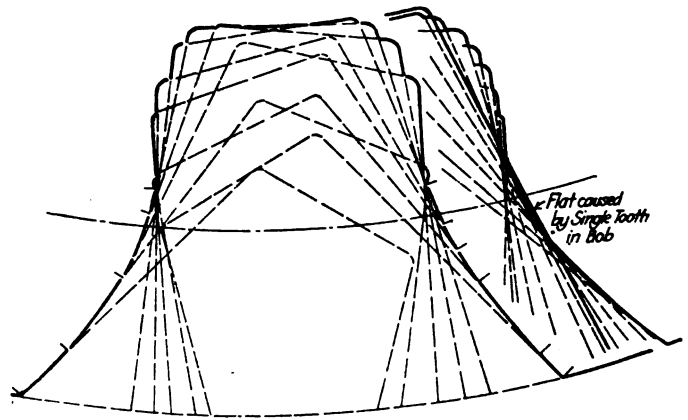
A SINGLE HIGH TOOTH IN A HOB WILL PRODUCE A WIDER FLAT IN THE GEAR THAN IF ALL THE TEETH ARE OF UNIFORM HEIGHT
